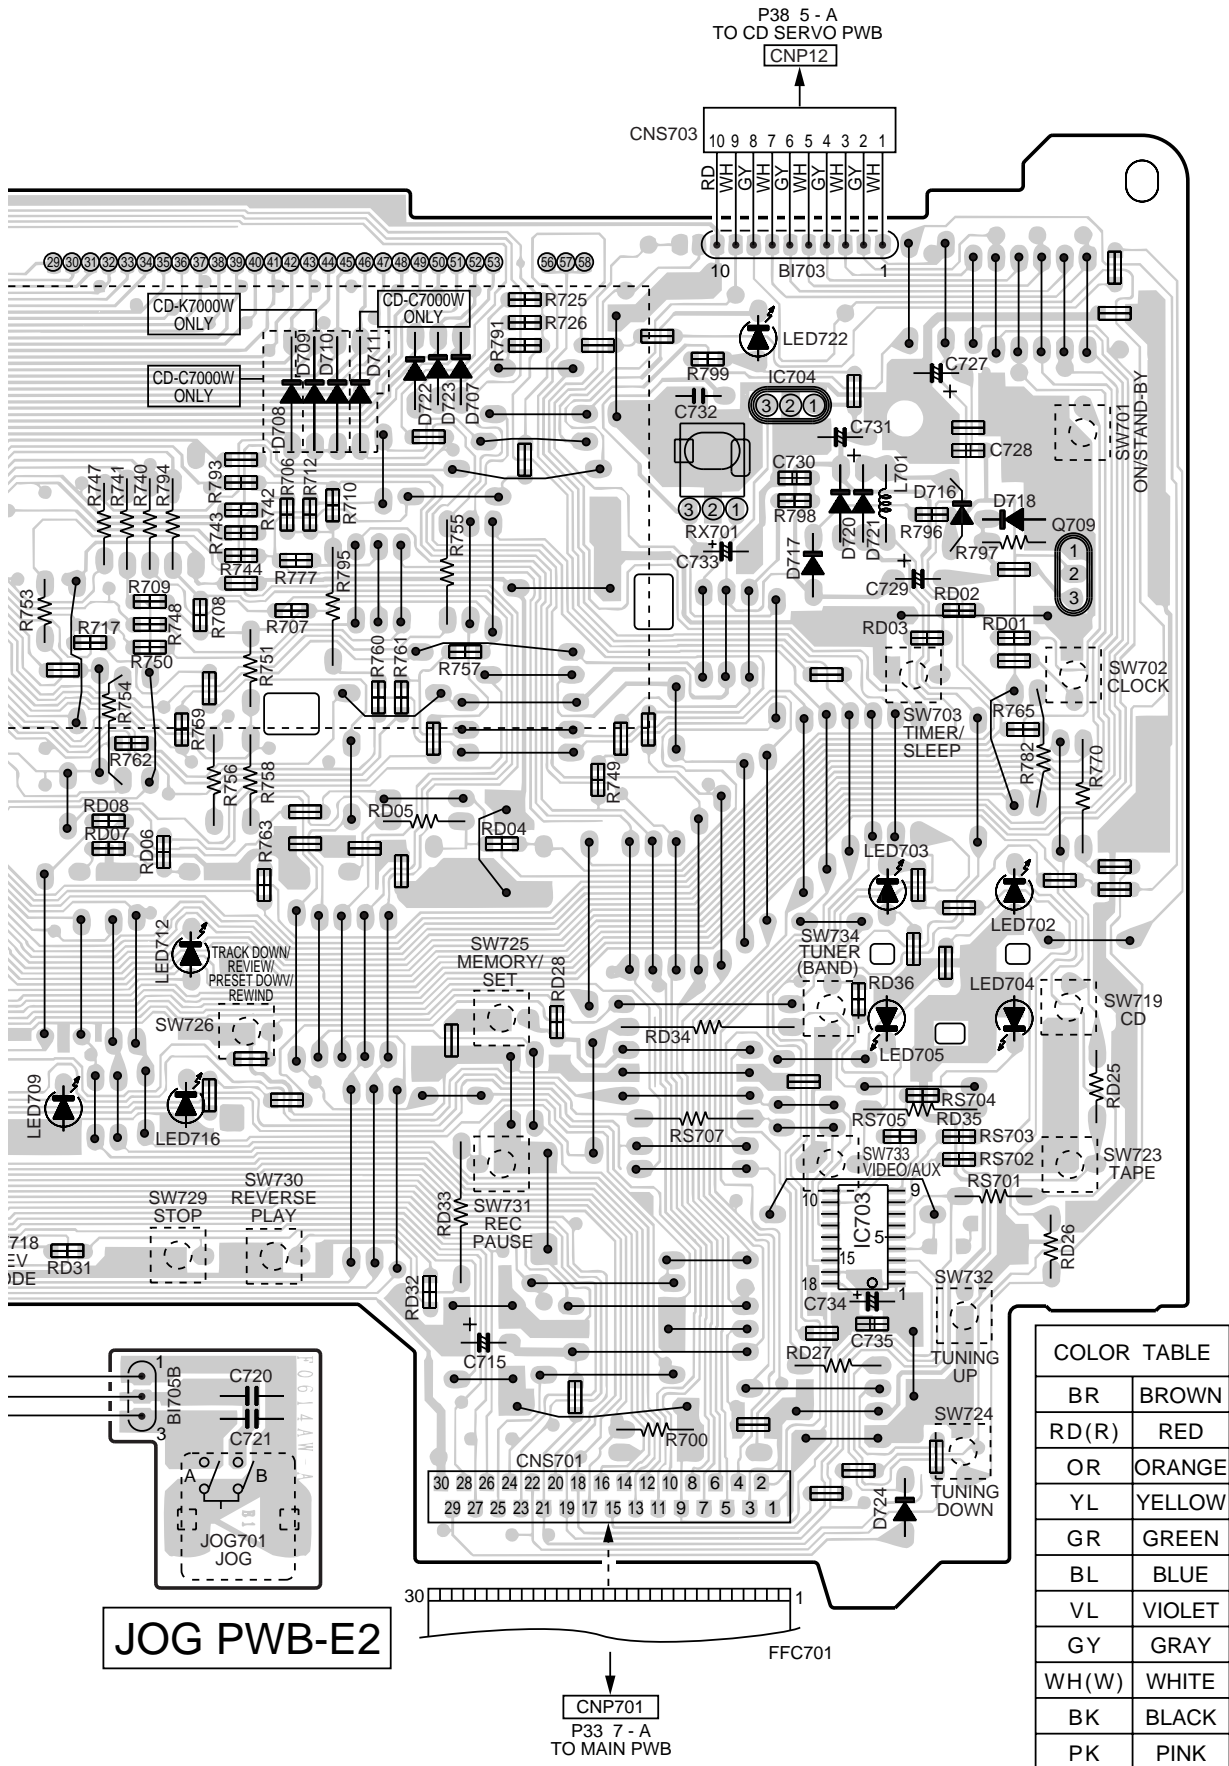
WIRING SIDE OF P.W.BOARD (4/8)
